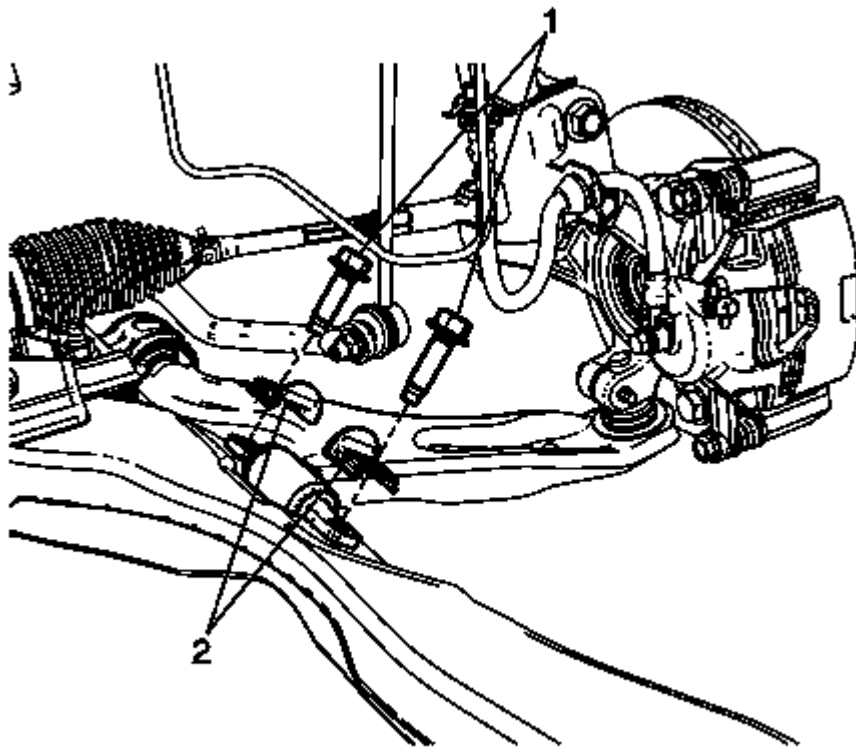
Cradle Bolts And Front Lower Control Bushing Brackets
